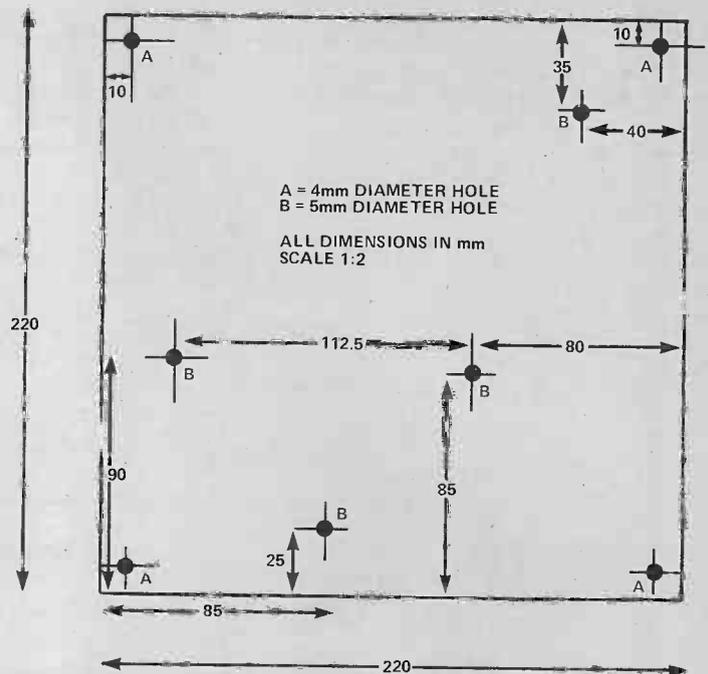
This diagram shows the drilling positions for the choke and mounting screwholes on the crossover panel.
